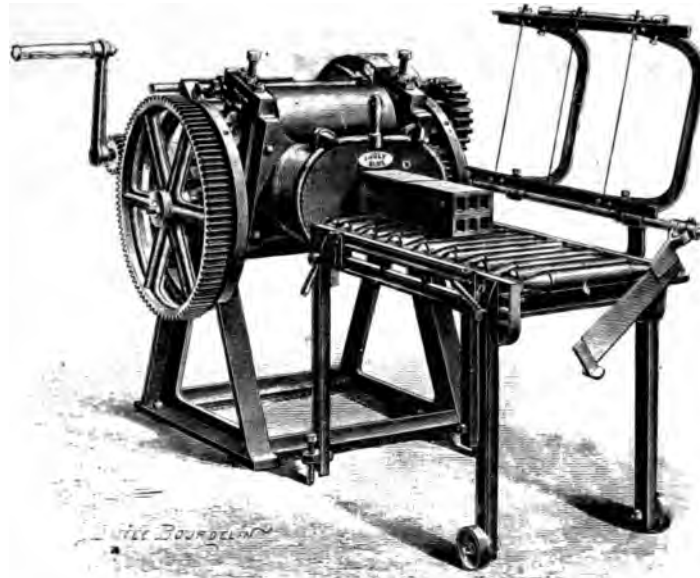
Hand Cylinder Machine with Movable Frame (Joly). V348
